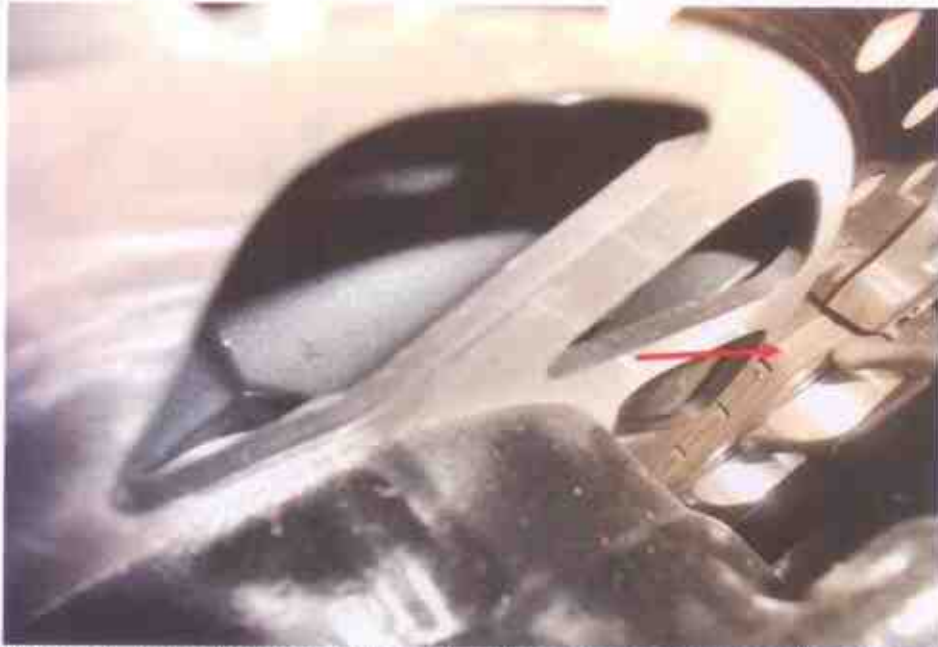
shows the front brake pad at time of our inspection. The frictional material was observed to be sufficient for operational purposes.
